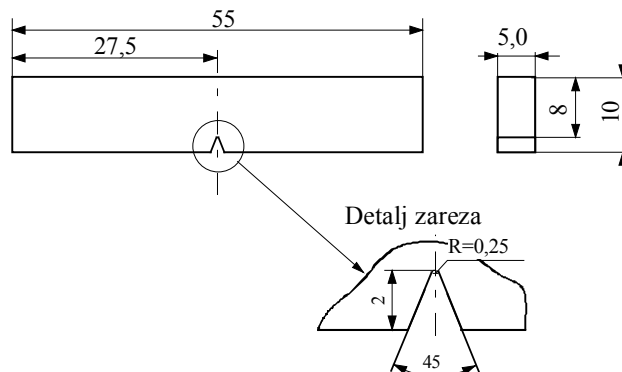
Shape and dimensions of standard specimen for Charpy pendulum impact testing of V-notched specimens.
